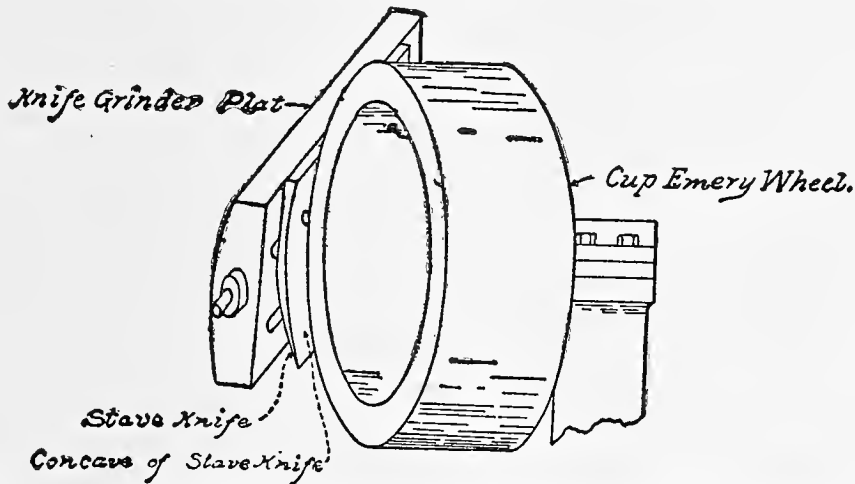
DETAIL SKETCH OF CONCAVE GRINDING OF STAVE CUTTER KNIFE.
